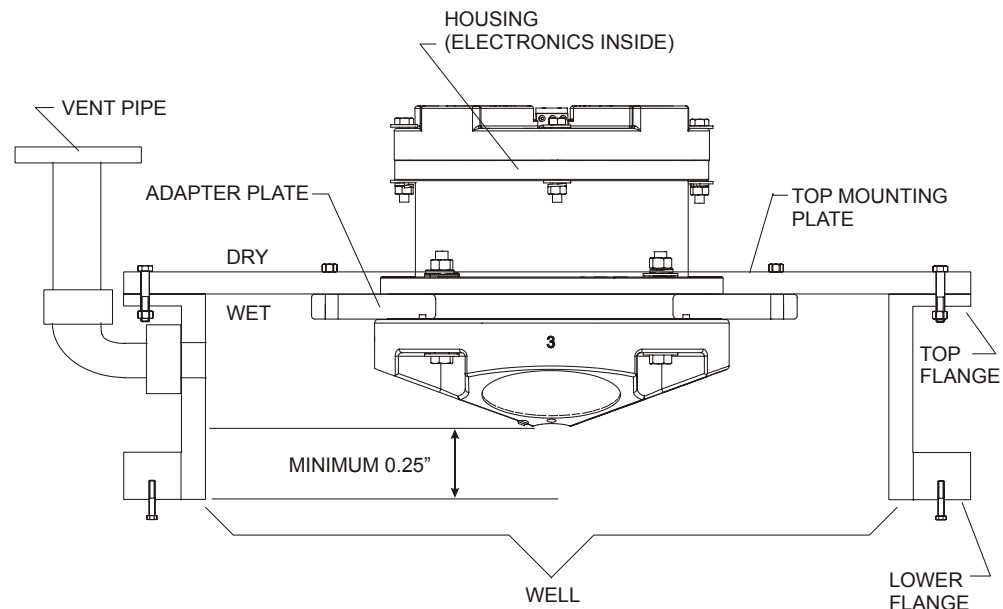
Sea Chest Mounted Transducer (With Mariner Adapter Plate)
